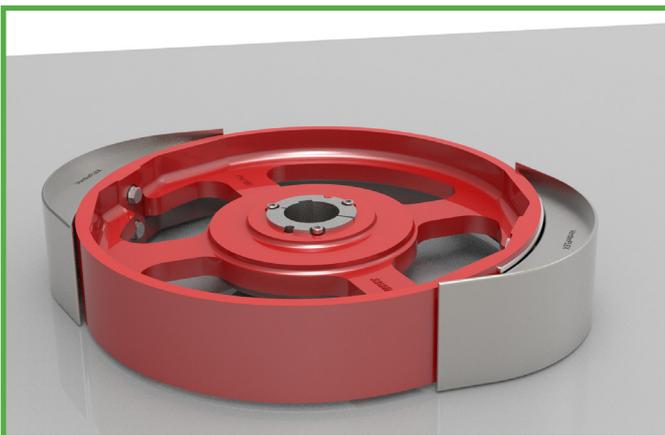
Mounting Rotor Shoes on the Rotor (Step 3)
